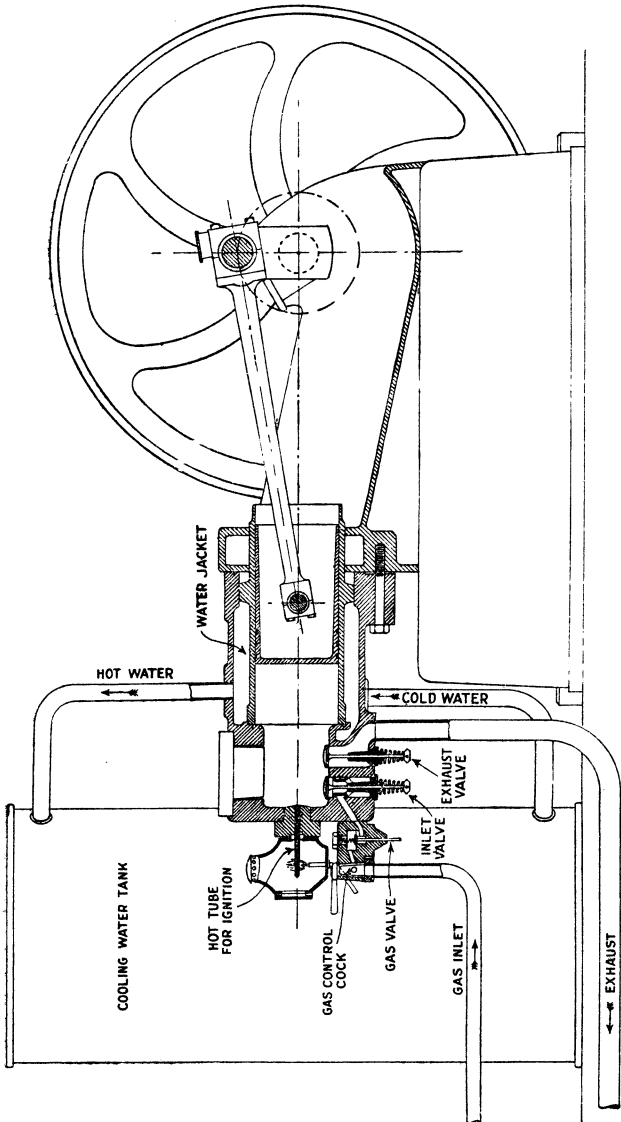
GENERAL ARRANGEMENT OF GAS ENGINE.
